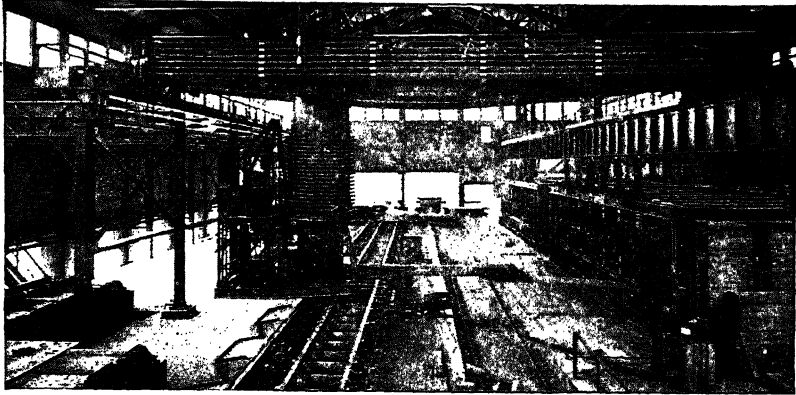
Crane charging machine for batch-type billet-heating furnaces.
